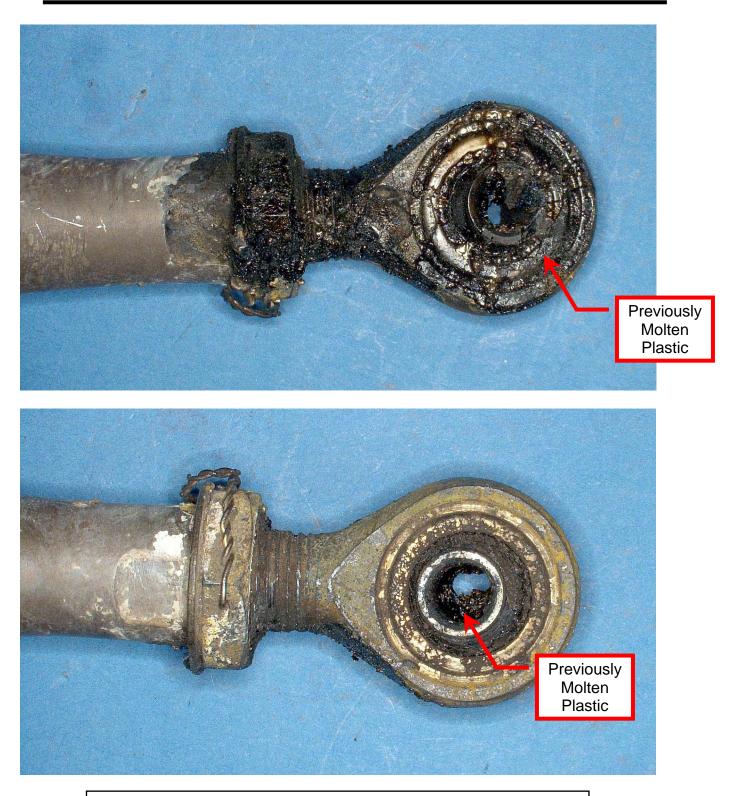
Both sides of the input rod upper rod end fitting showing the black previously molten Nylon 12 material on one side (top) partially blocking the bolt hole (bottom).
